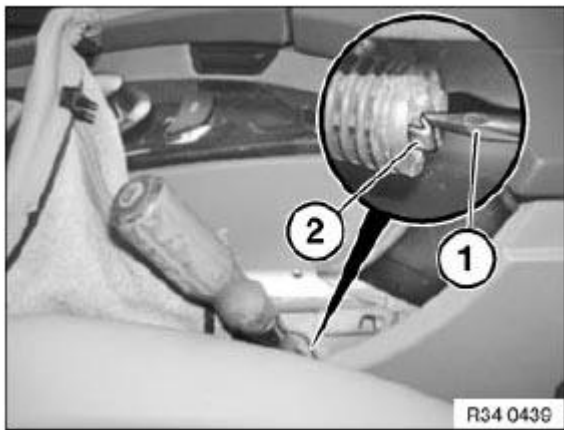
Turning Adjusting Screw With Screwdriver
